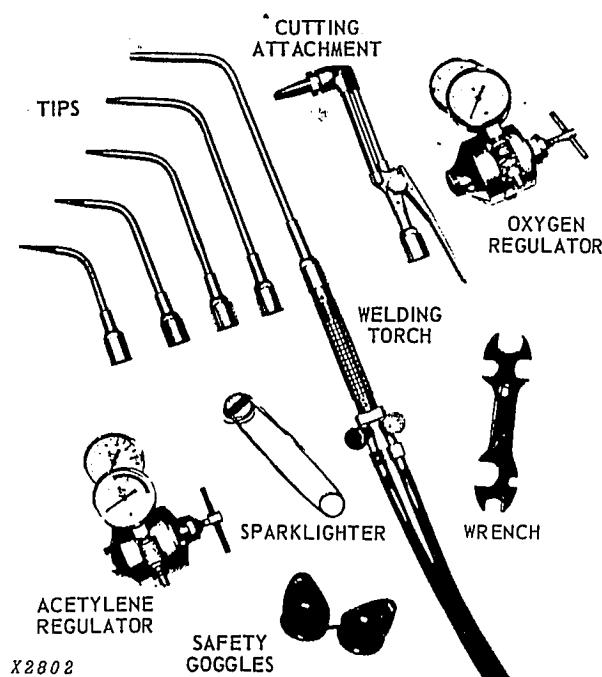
Oxyacetylene Welding Outfit
